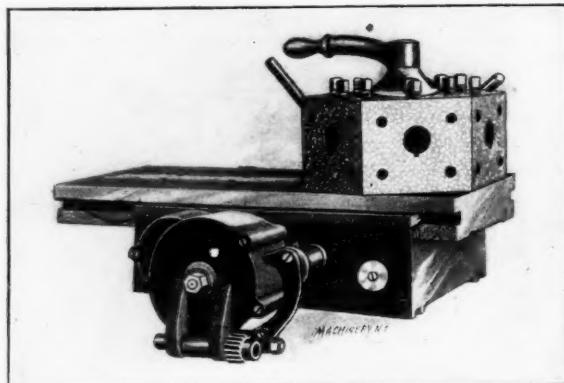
Automatic Power Feed Turret Head, Rear View.
